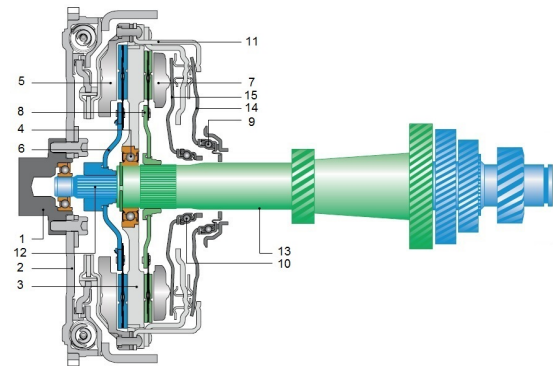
A typical dual dry clutch scheme [3] - (1) crankshaft, (2) dual mass flywheel, (3) central plate, (4) support bearing, pressure plates of the first (5) and second (7) clutches, disc of the first (6) and second (8) clutches, engagement bearing of the first (9) and second (10) clutches, (11) tie rod, first (12) and second (13) transmission input shafts, lever spring of the first (14) and second (15) clutches.
